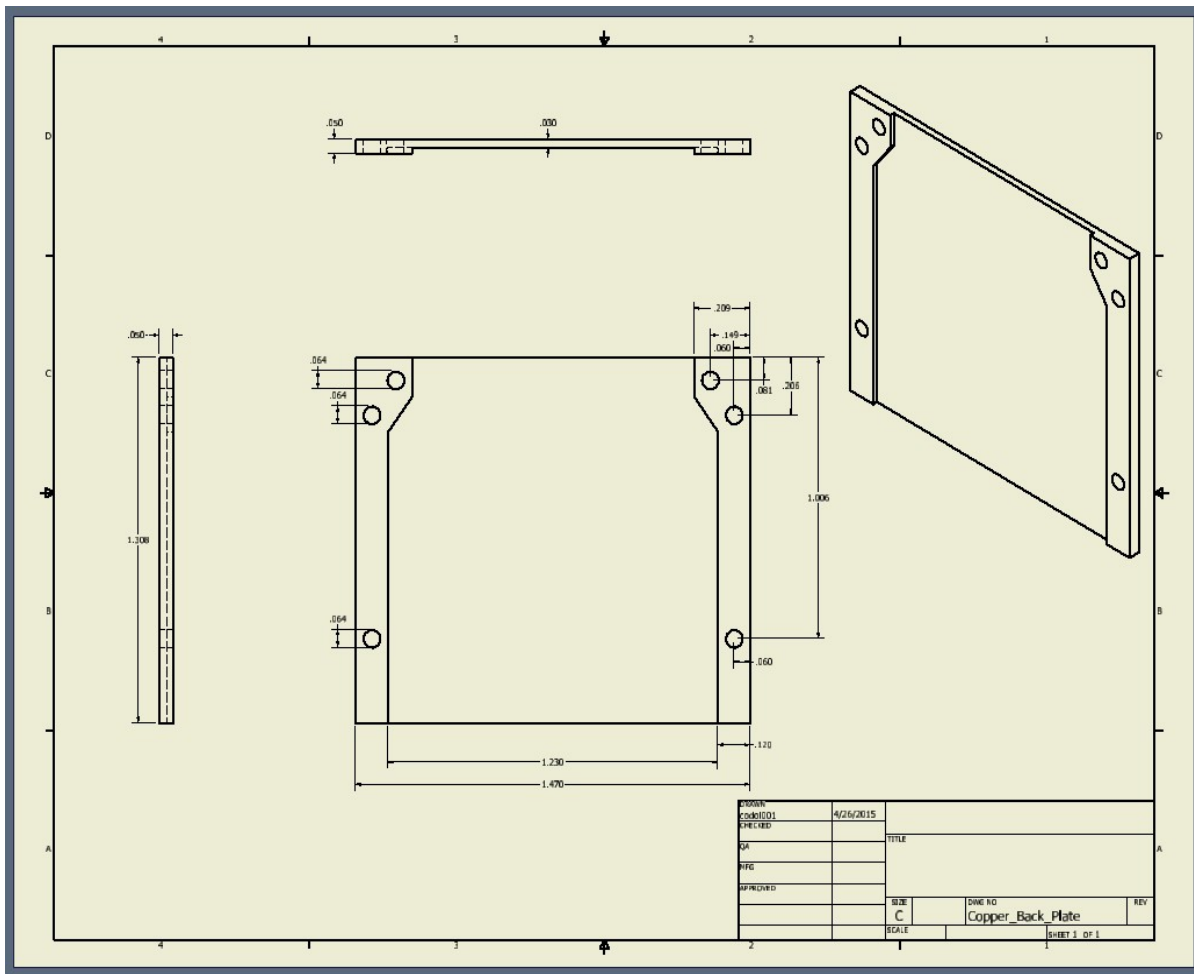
Copper back plate that will be used to secure the PCB to the detector housing. Units shown are in inches.
